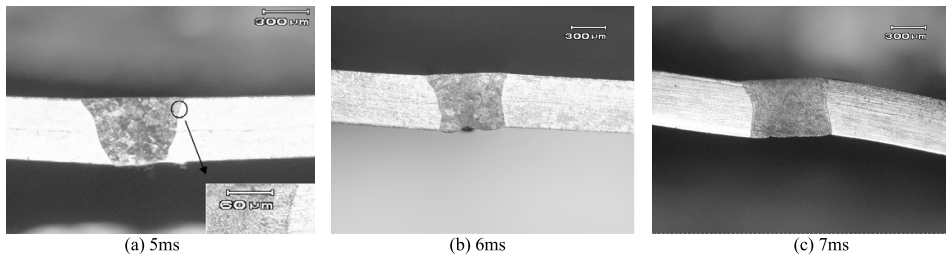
Weld morphology: 1.5J, 30Hz, -1mm defocus, 100mm/min
